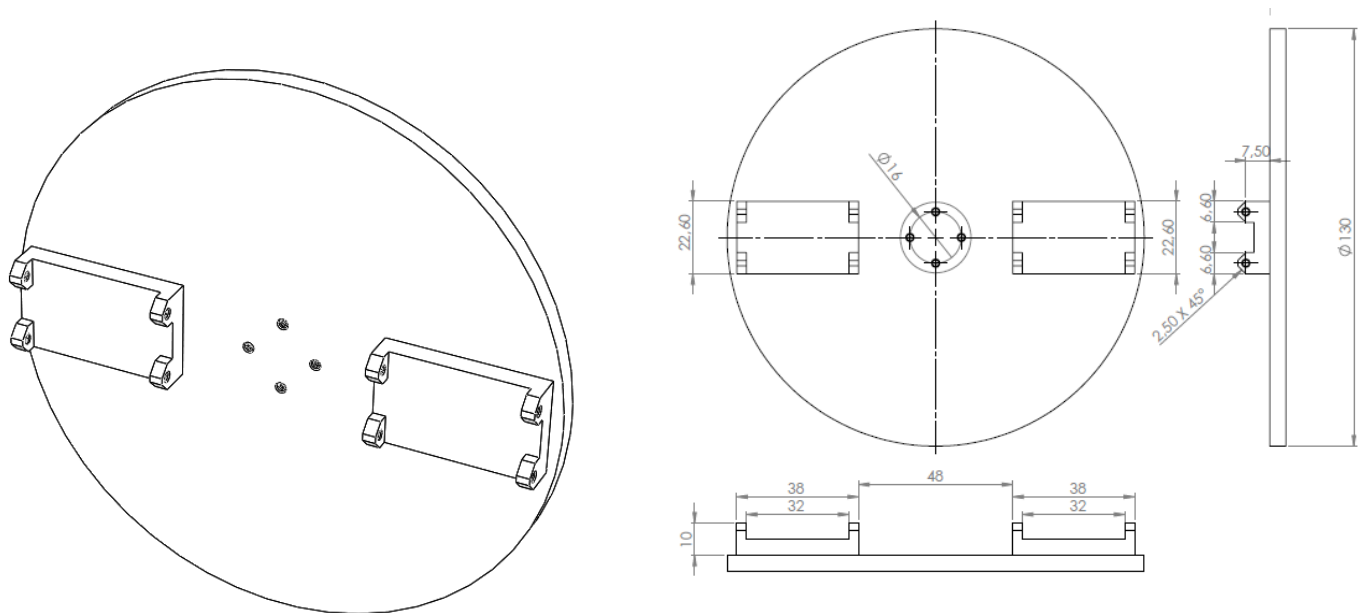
Technical Drawing and Trimetric Views of the Bottom Plate
